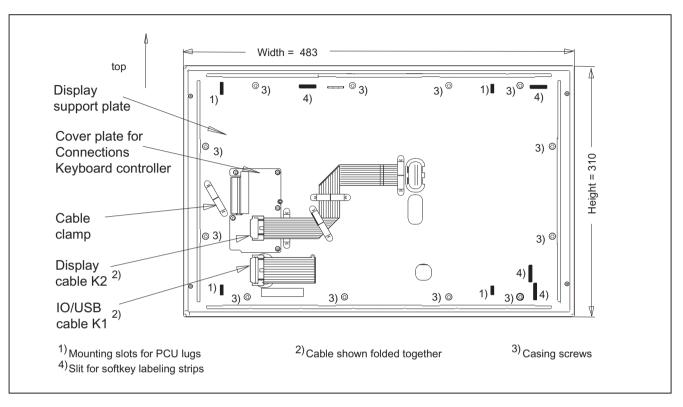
Dimension sheet for attaching the PCU to the OP 012 operator panel front
